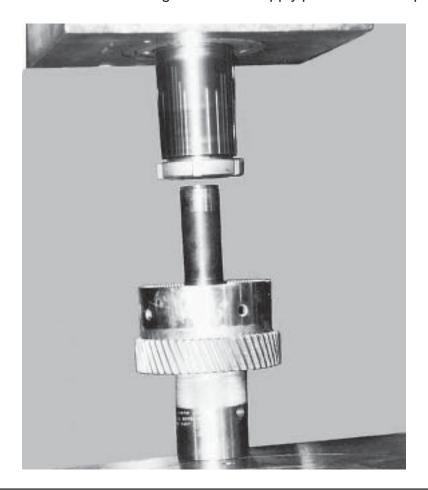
Pressing Clutch Shaft Into Transfer Gear
